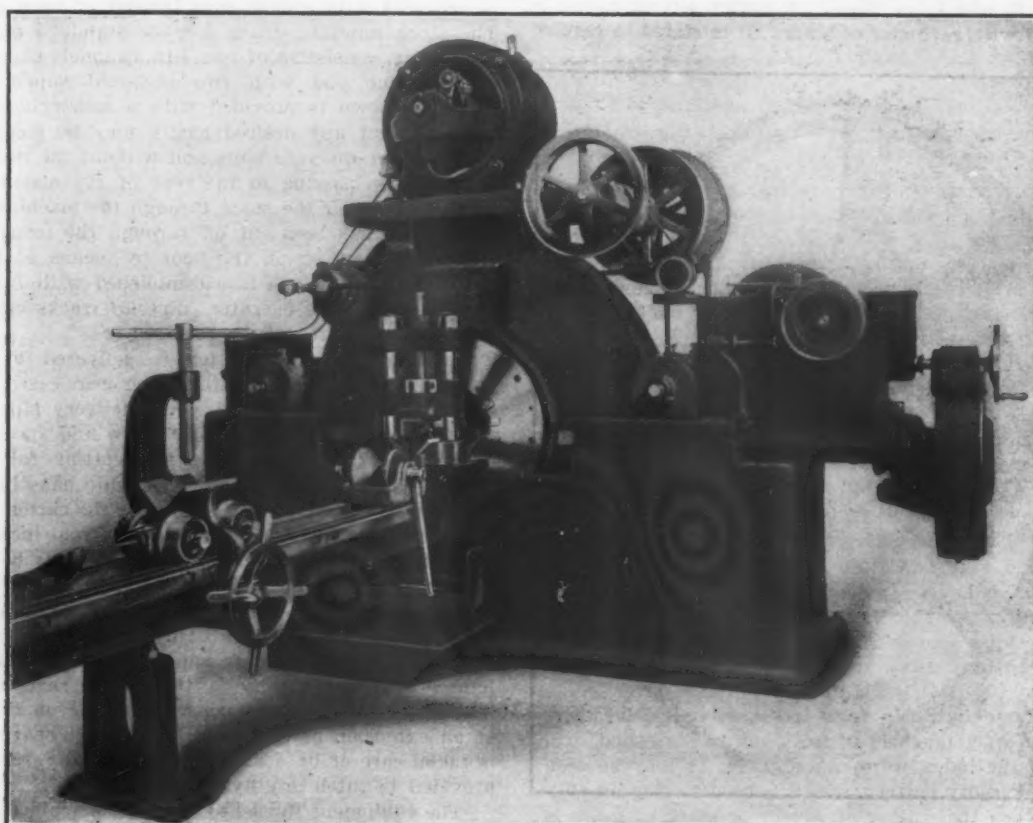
The No. 2-B Motor Driven Cutting-Off Machine Built by the George Gorton Machine Company, Racine, Wis.
